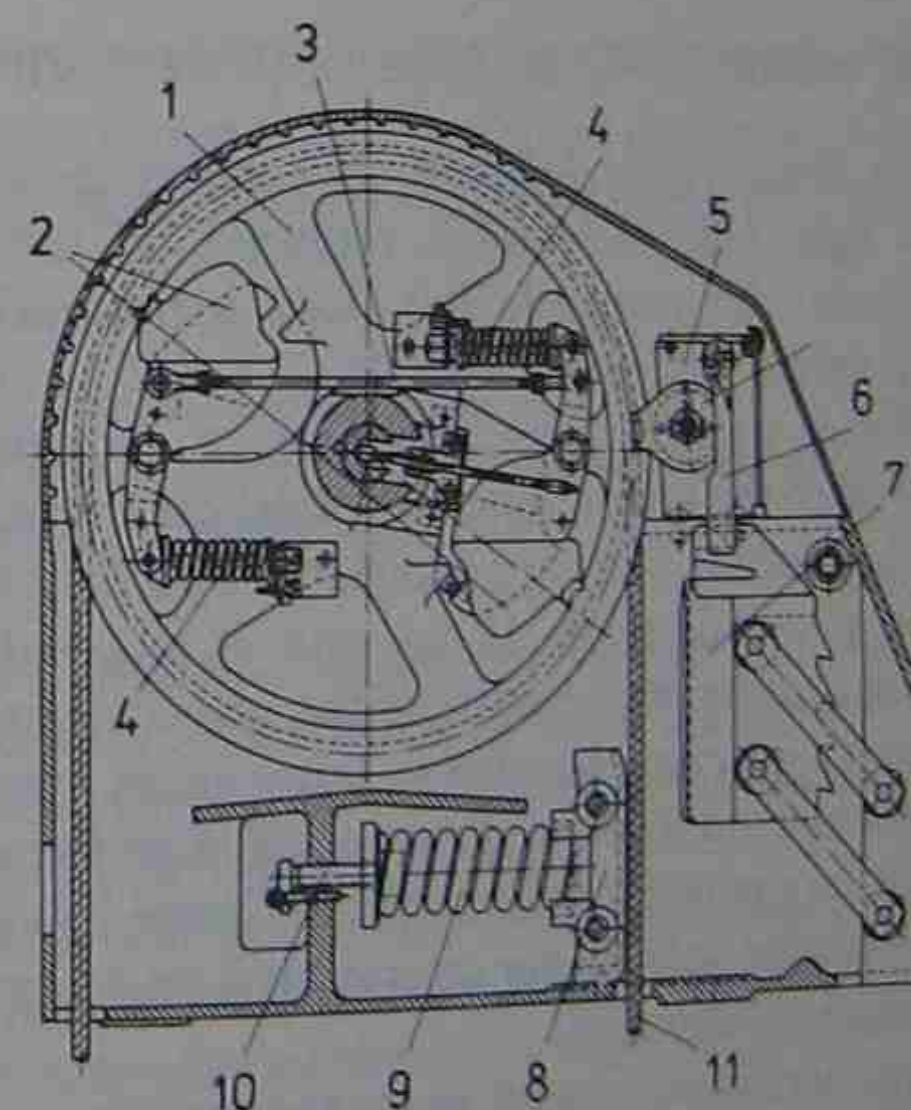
Centrifugal overspeed governor (Otis Elevator Co.). 1. Governor pulley; 2. Two pivoted flyweights; 3. Rod; 4. Helical springs; 5. Switch; 6. Latching device; 7. Swinging jaw; 8. Fixed jaw; 9. Helical spring; 10. Adjusting bolt; 11. Governor rope.
